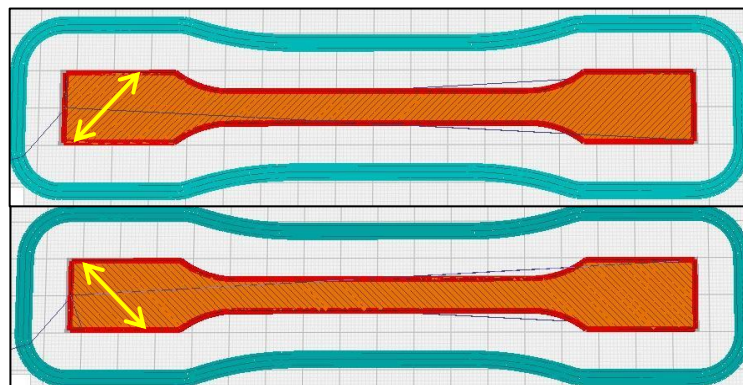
Slicing preview of the tensile specimen in Ultimaker Cura, showing layer deposition path.
